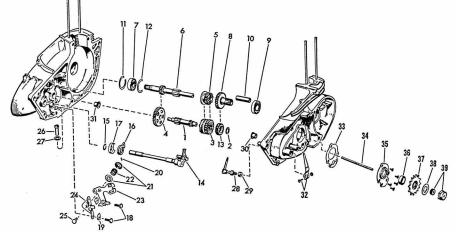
Exploded view of the transmission gears and shifter parts.
